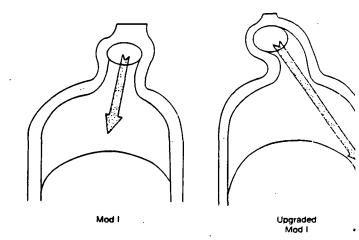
Cylinder Housing with Piston at Bottom Dead Center: Gas Flow from Manifold
